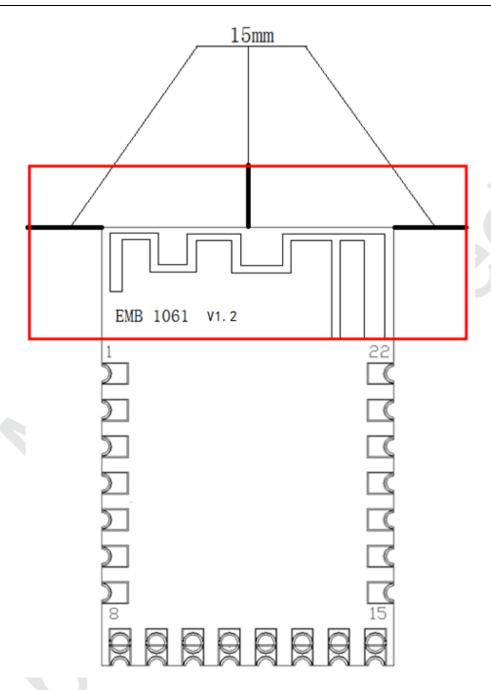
Minimum Clearance Zone of PCB Antenna (Unit: mm)
